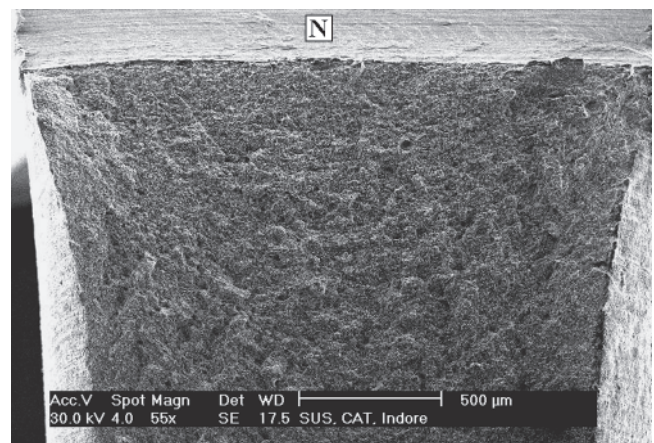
Low-magnification view of the fracture surface of notch tensile-tested LCW specimen near the notch root (N)
